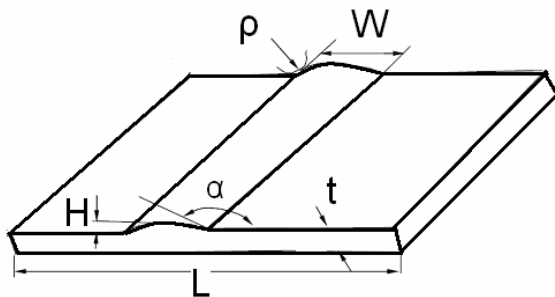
Weld geometry parameters at butt welded joint.
